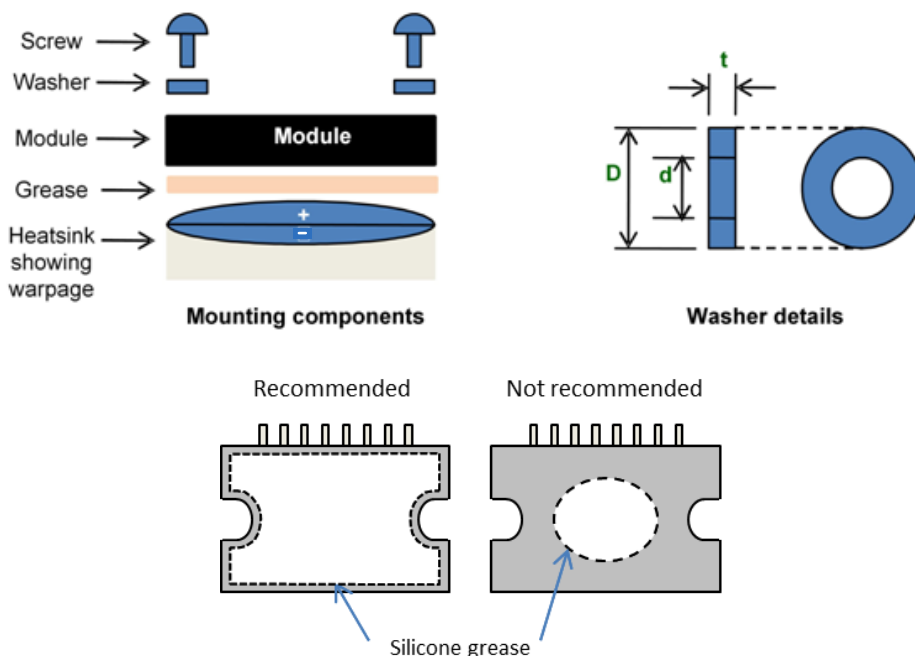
Module Mounting Details: Components; Washer Drawing; Need for Even Spreading of Thermal Grease
